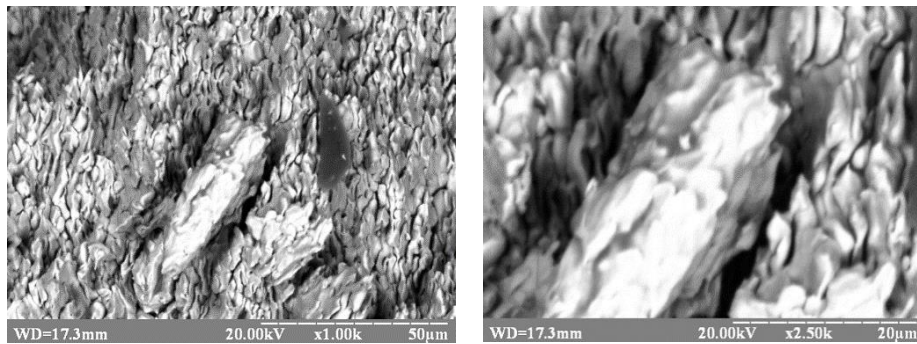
Fracture surfaces of the composite materials reinforced with non-plated (a) and Ni-plated (b) carbon fibres after sintering at 900°C.
